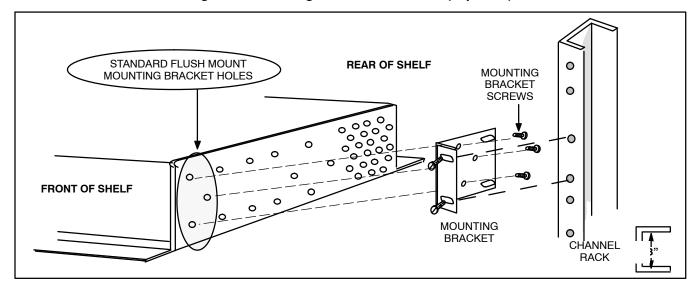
Shelf Mounting Bracket Position for Standard Flush Mount
